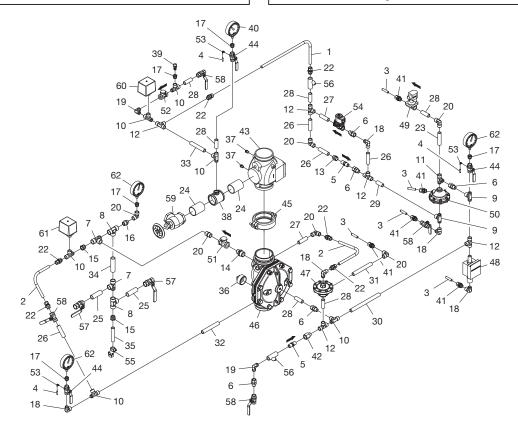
(4 OF 6) DN100 DV-5 PREACTION TYPE A TRIM ASSEMBLY EXPLODED VIEW
